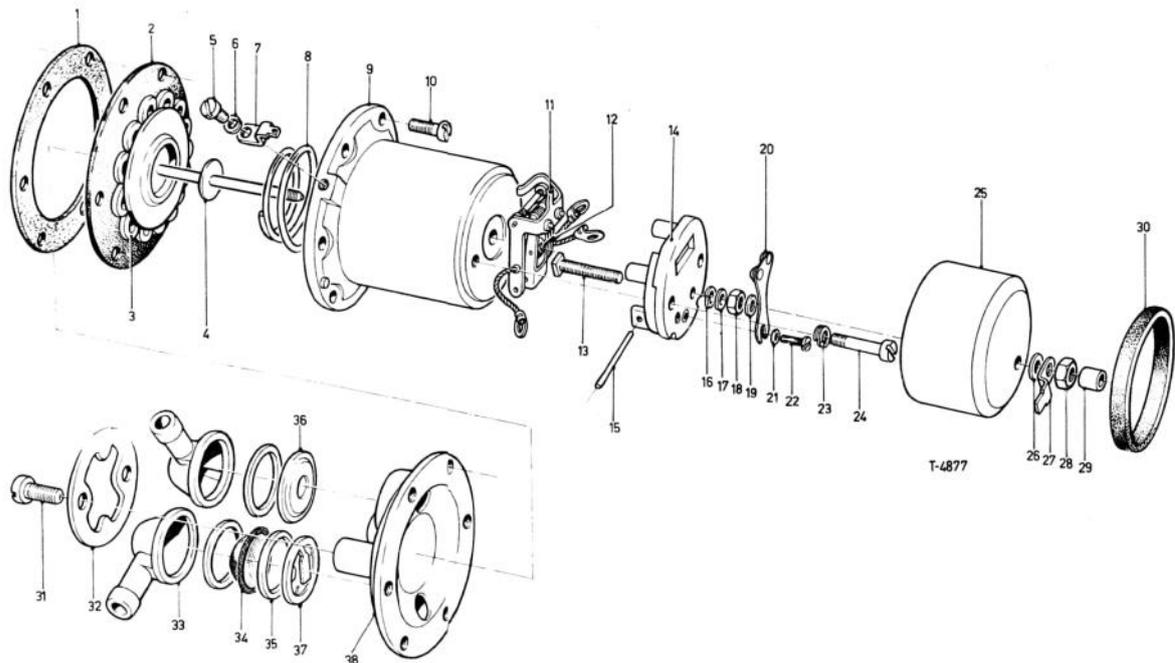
Fuel pump, exploded view, SU.AUF 201
